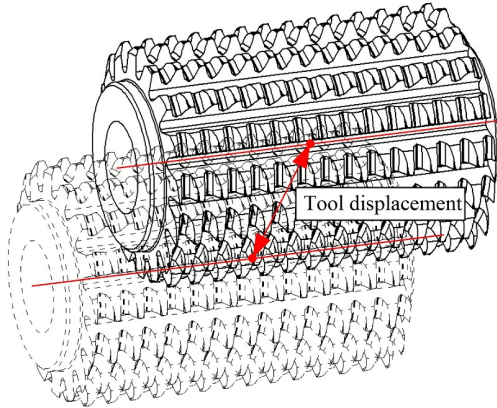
Schematic of tool displacement of the hobbing machine tool.
